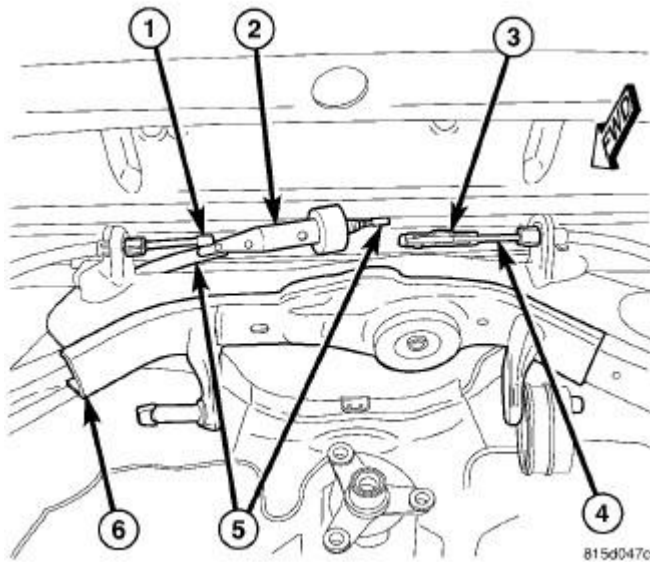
PARKING BRAKE CABLES AT REAR CROSSMEMBER
